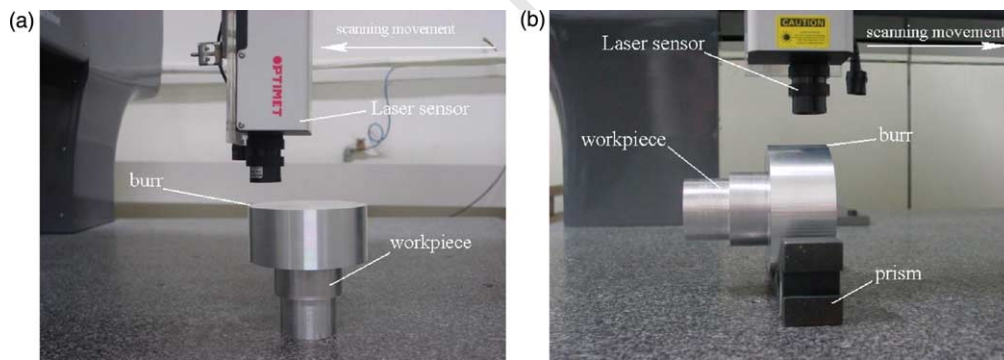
Measurements of a burr using the laser measurement system: (a) along exit surface, (b) along machining surface.
